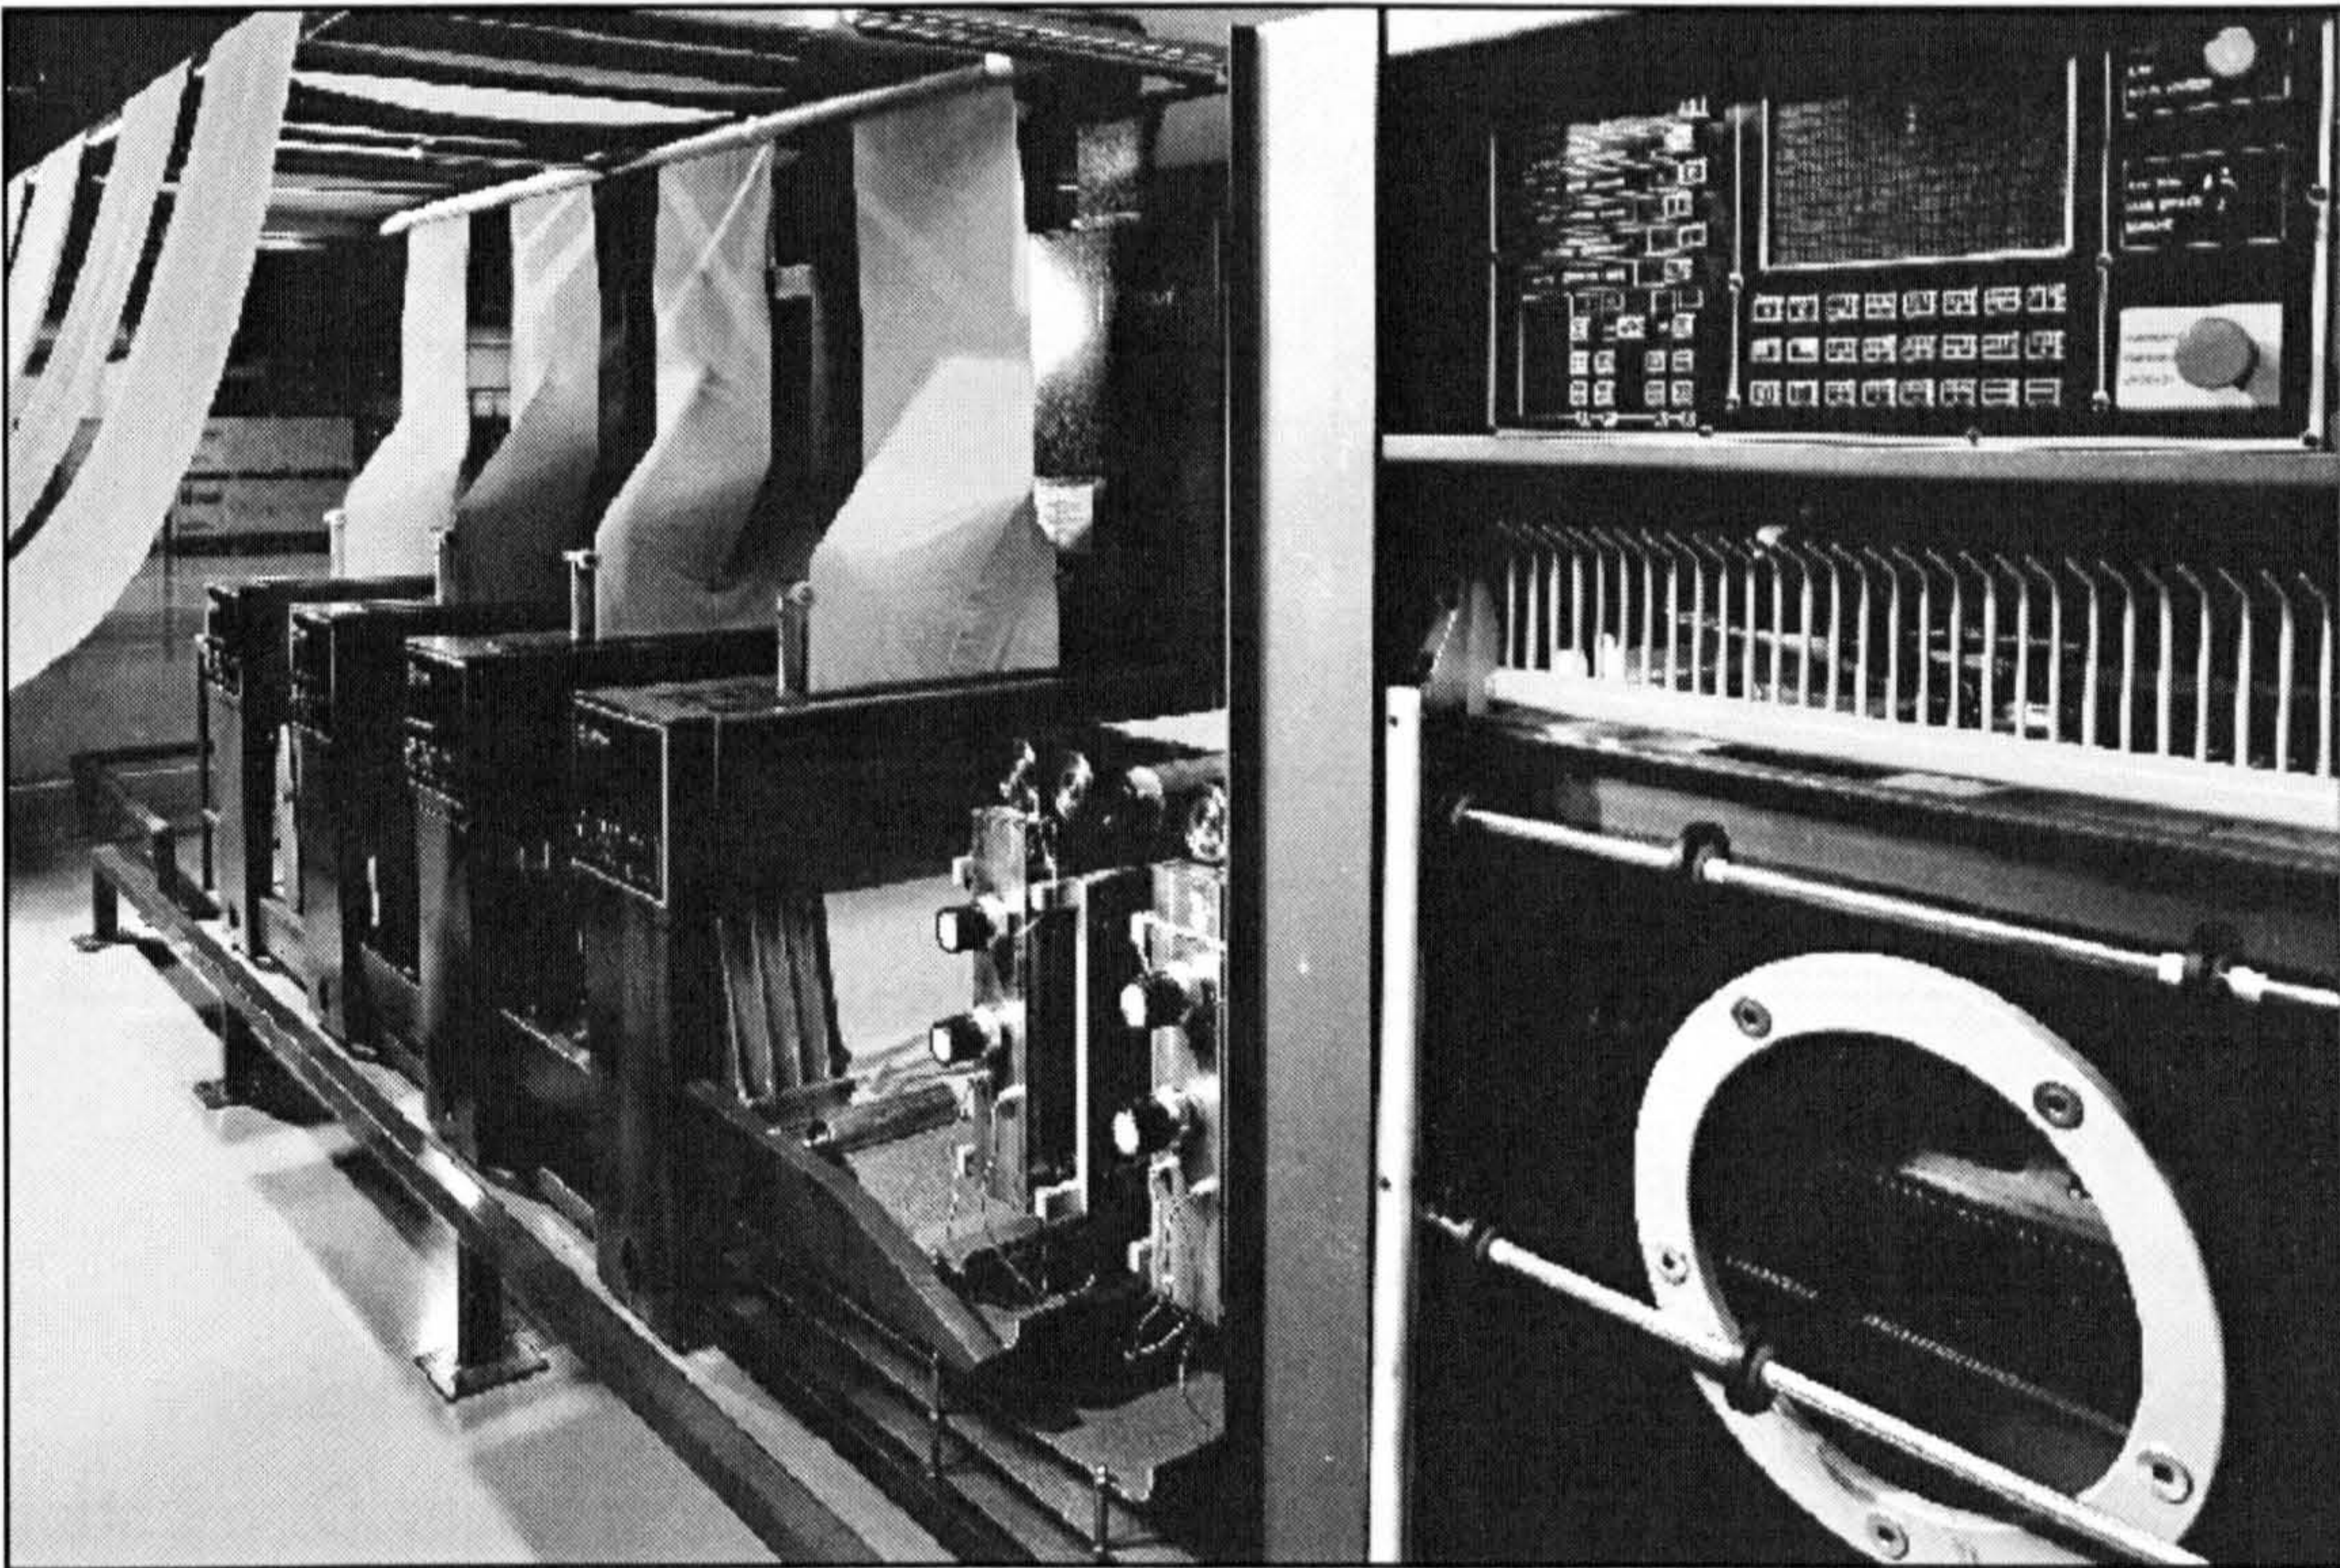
A cutting machine, where the continuous length of fabric is cut into garment parts.
